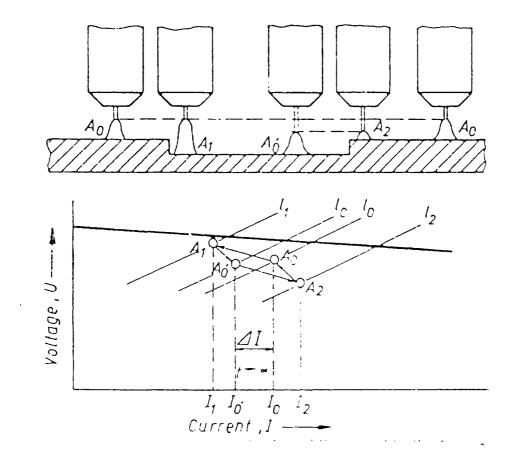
The Welding Arc Self-adjustment Process⁵²
